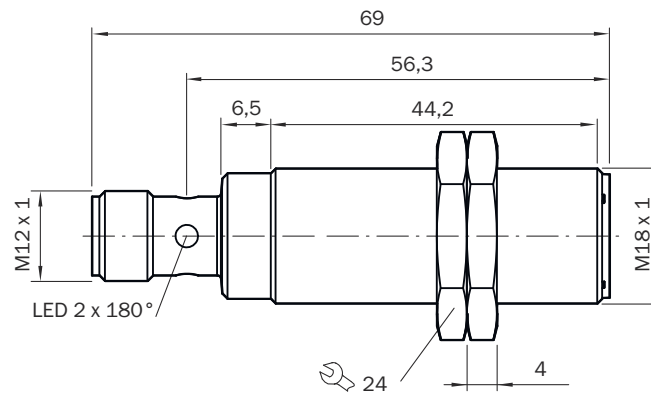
IME2S18-\*\*B\*\*C0 dimensional drawing
